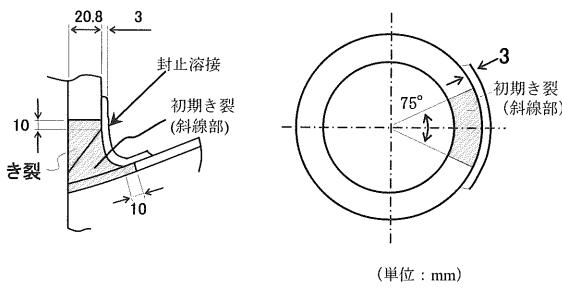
Example results of full scale seal welding test of CRD stub-tube
